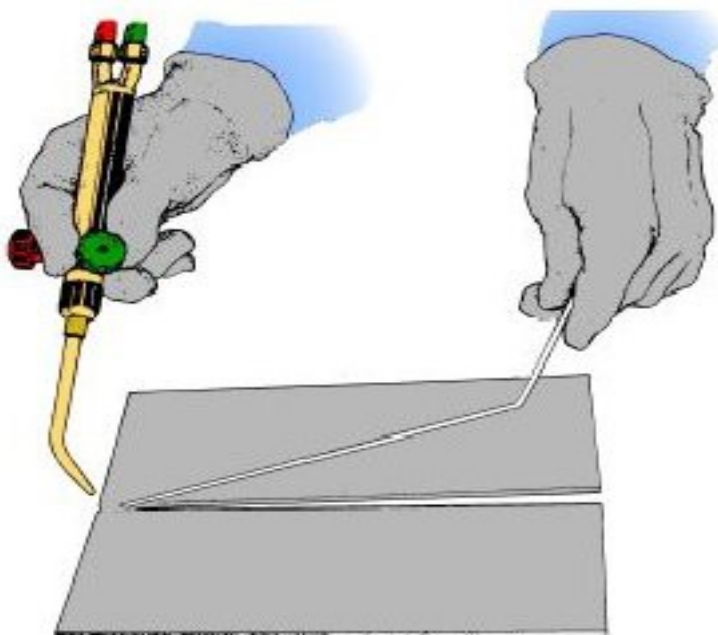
Before trying this, light the torch and practice running a puddle across the 1/16" thick sheet without using welding rod. Start by holding the torch still, with the inner cone of the flame about 1/8 in. (3 mm) from the surface of the metal, until a small pool of molten metal has formed. Then start to move the flame back and forth in a series of short arcs or semi-circles, advancing the puddle as steadily as possible from right to left. You may find it difficult to avoid melting a hole through the sheet. If necessary, cut back on flame size, increase clearance
